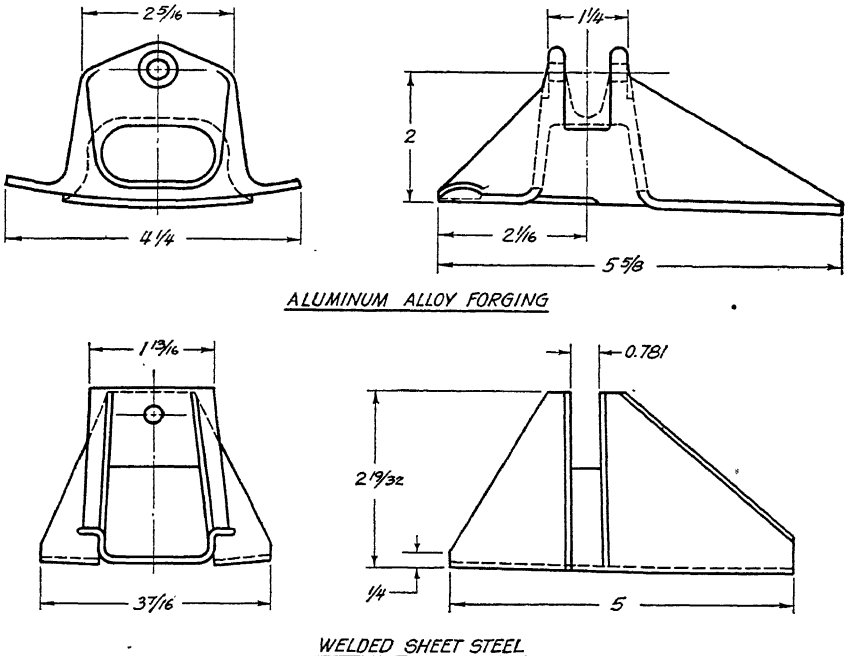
6.—Investigation of two designs for this bracket showed that the weld assembly is considerably cheaper than the forging until large quantities are needed.
